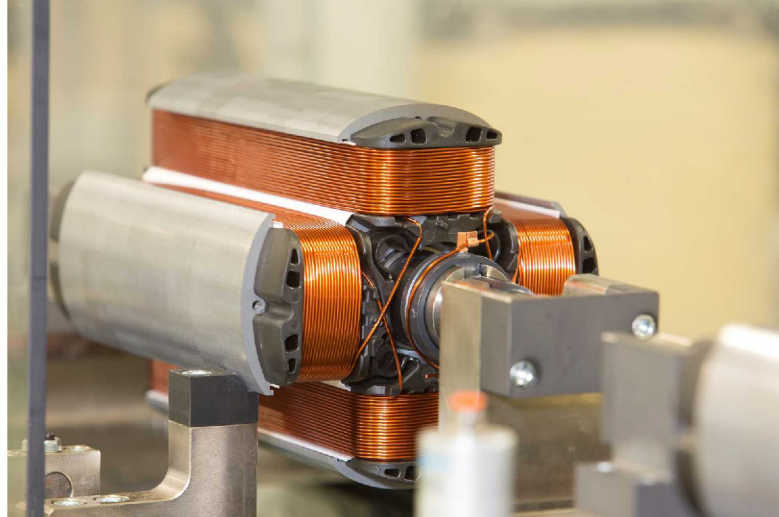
Rotor winding of Renault R240 motor. Reprinted from [20].
